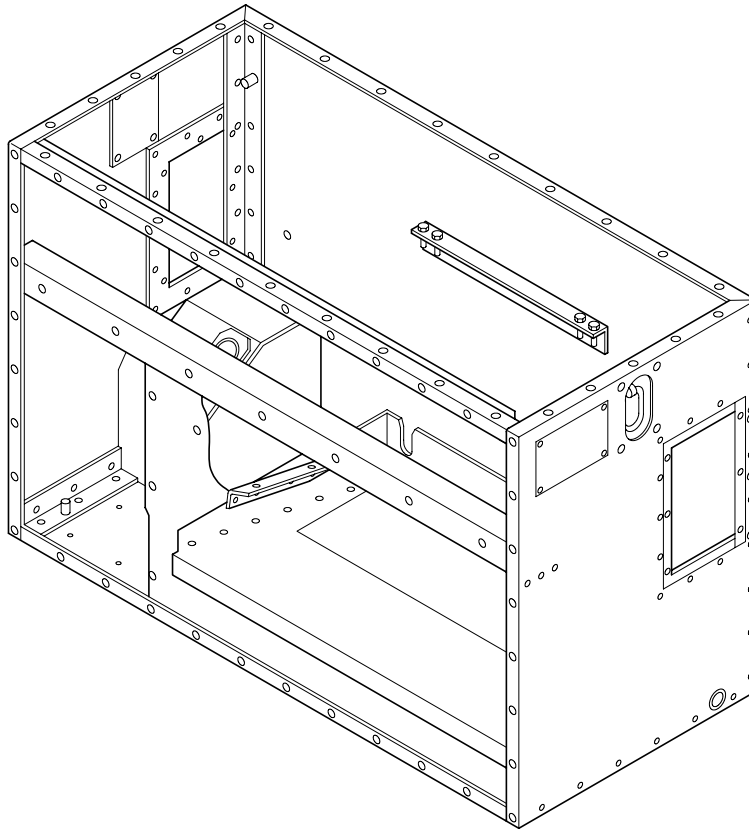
EVAPORATOR HOUSING ASSEMBLY.
